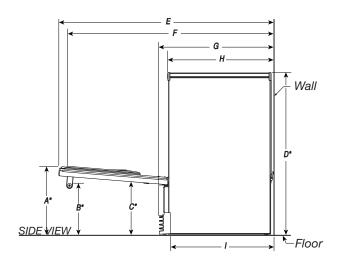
DETAILED PLANNING DIMENSIONS 18" ICE MACHINES
